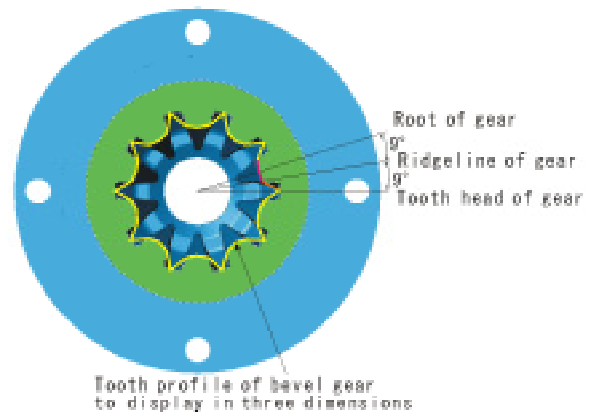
A method to display tooth profile of the bevel gear in three dimensions
